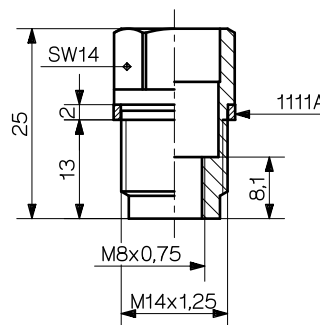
Adapter Type 6589Q01. Sensor flush mounted
